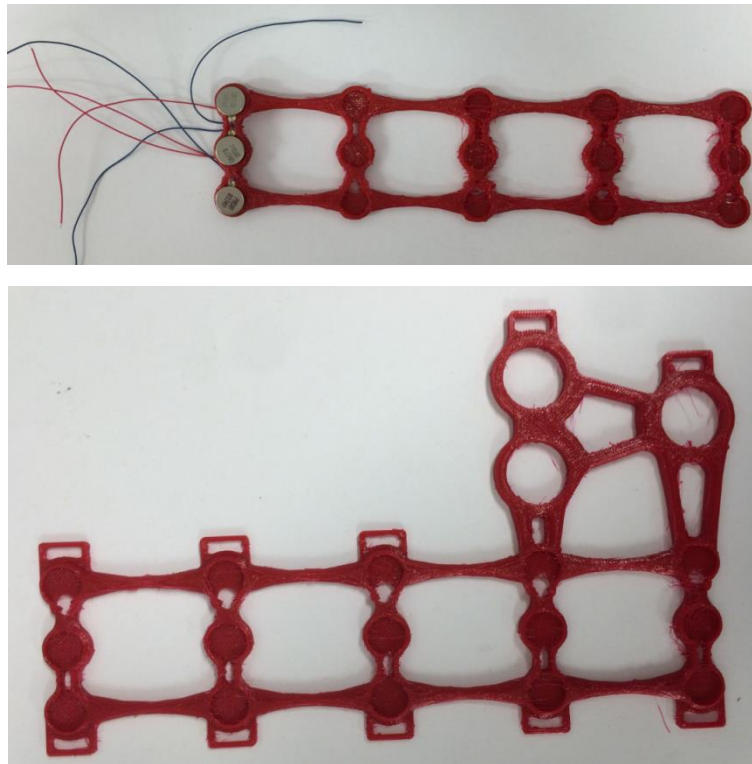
Prototype tactor sockets additive manufactured using NinjaFlex.
